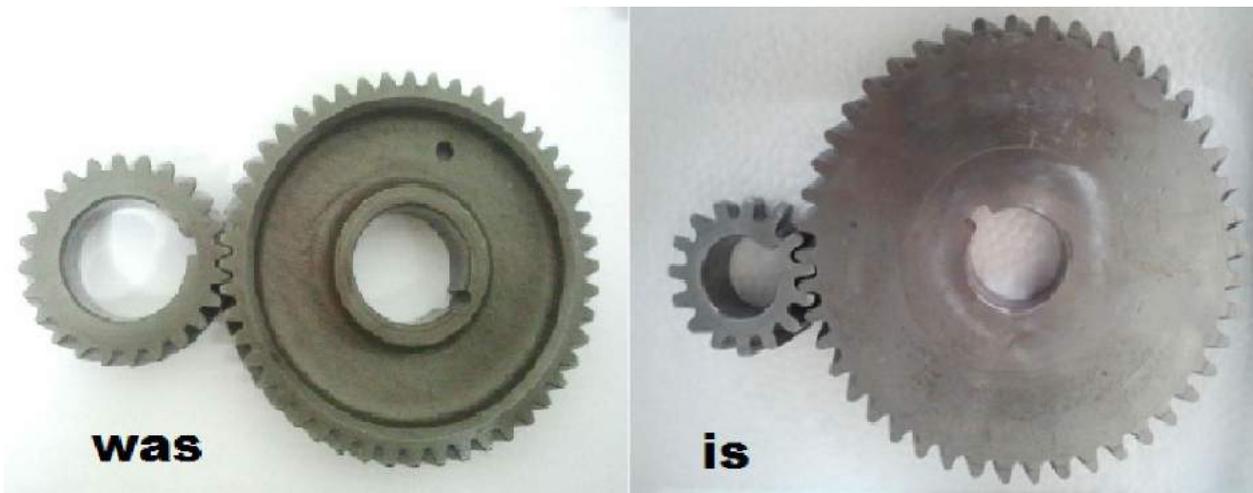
The unmodified and modified crank and cam shaft gear teeth (Shubham, 2016)
